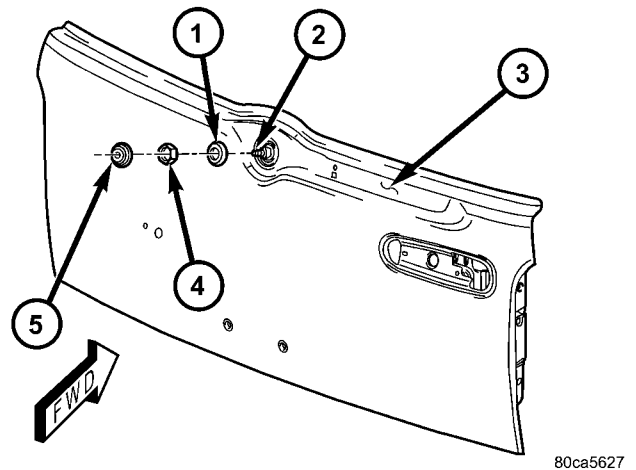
Rear Wiper Motor Output Shaft Nut Remove/Install
